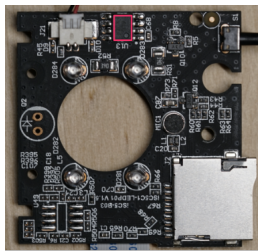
MicroSD PCB for the Main Board with motor driver in red
